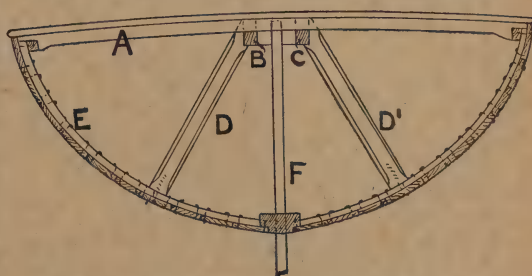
Cross Section Showing Construction of Model Racing Yacht
